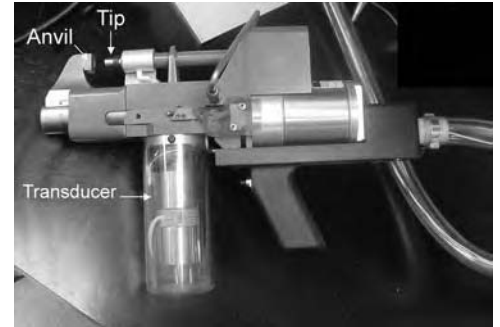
Hand-guided portable ultrasonic welding gun with tooling to squeeze and seal copper tubing used in air conditioning systems and refrigerators
